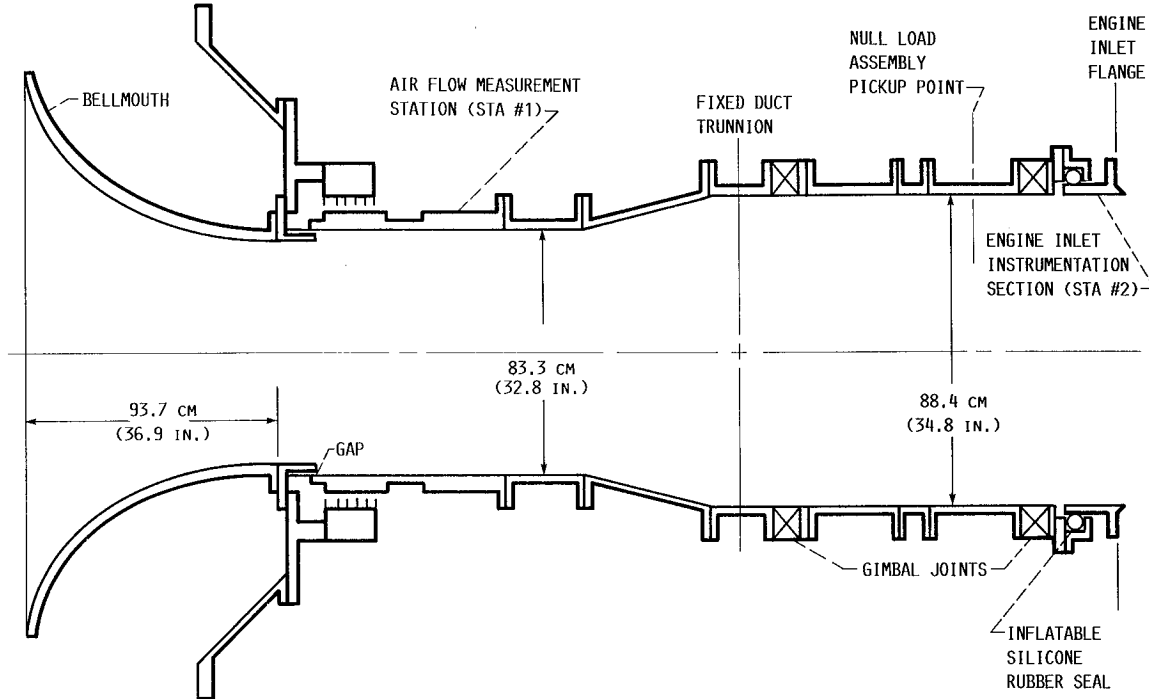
INLET DUCTING ARRANGEMENT.
